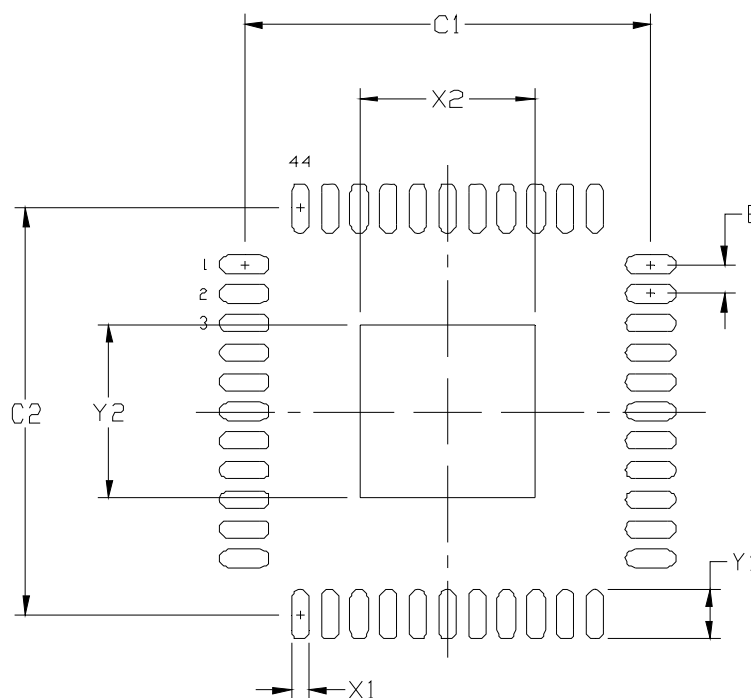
Si53302 7x7 mm 44-QFN Package Land Pattern
